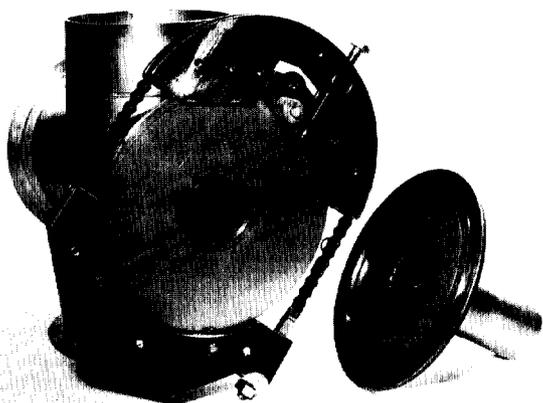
Tool for cutting open edge welded flanges.
